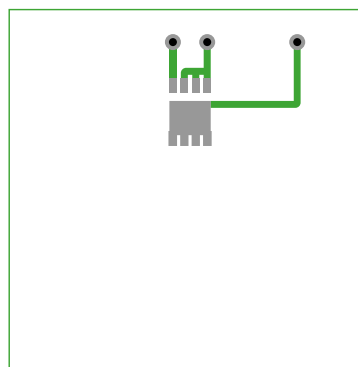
PCB layout for thermal resistance junction to ambient minimum footprint; FR4 Board; 2oz copper
